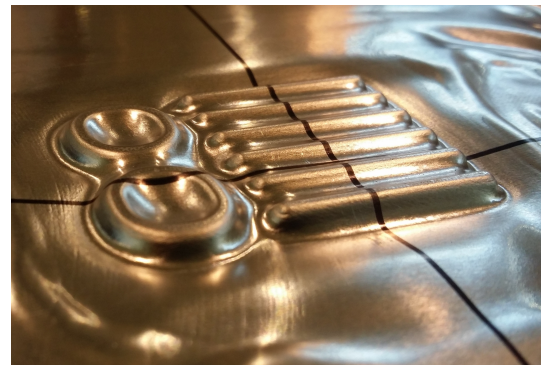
Test 3: DED die and machined finish; 3003 at 4.5 kJ
